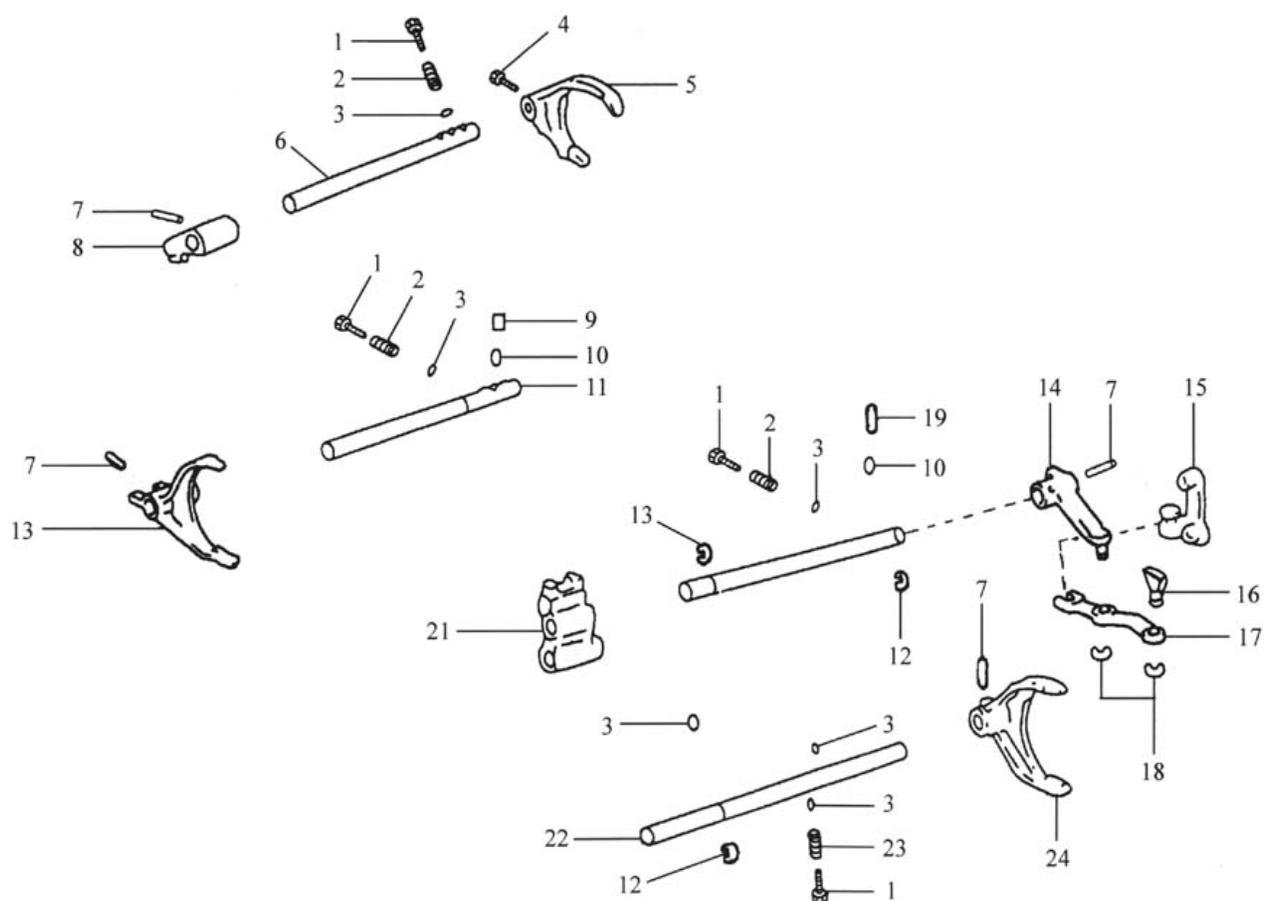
Intermediate Connecting Plate Component of Transmission-2
